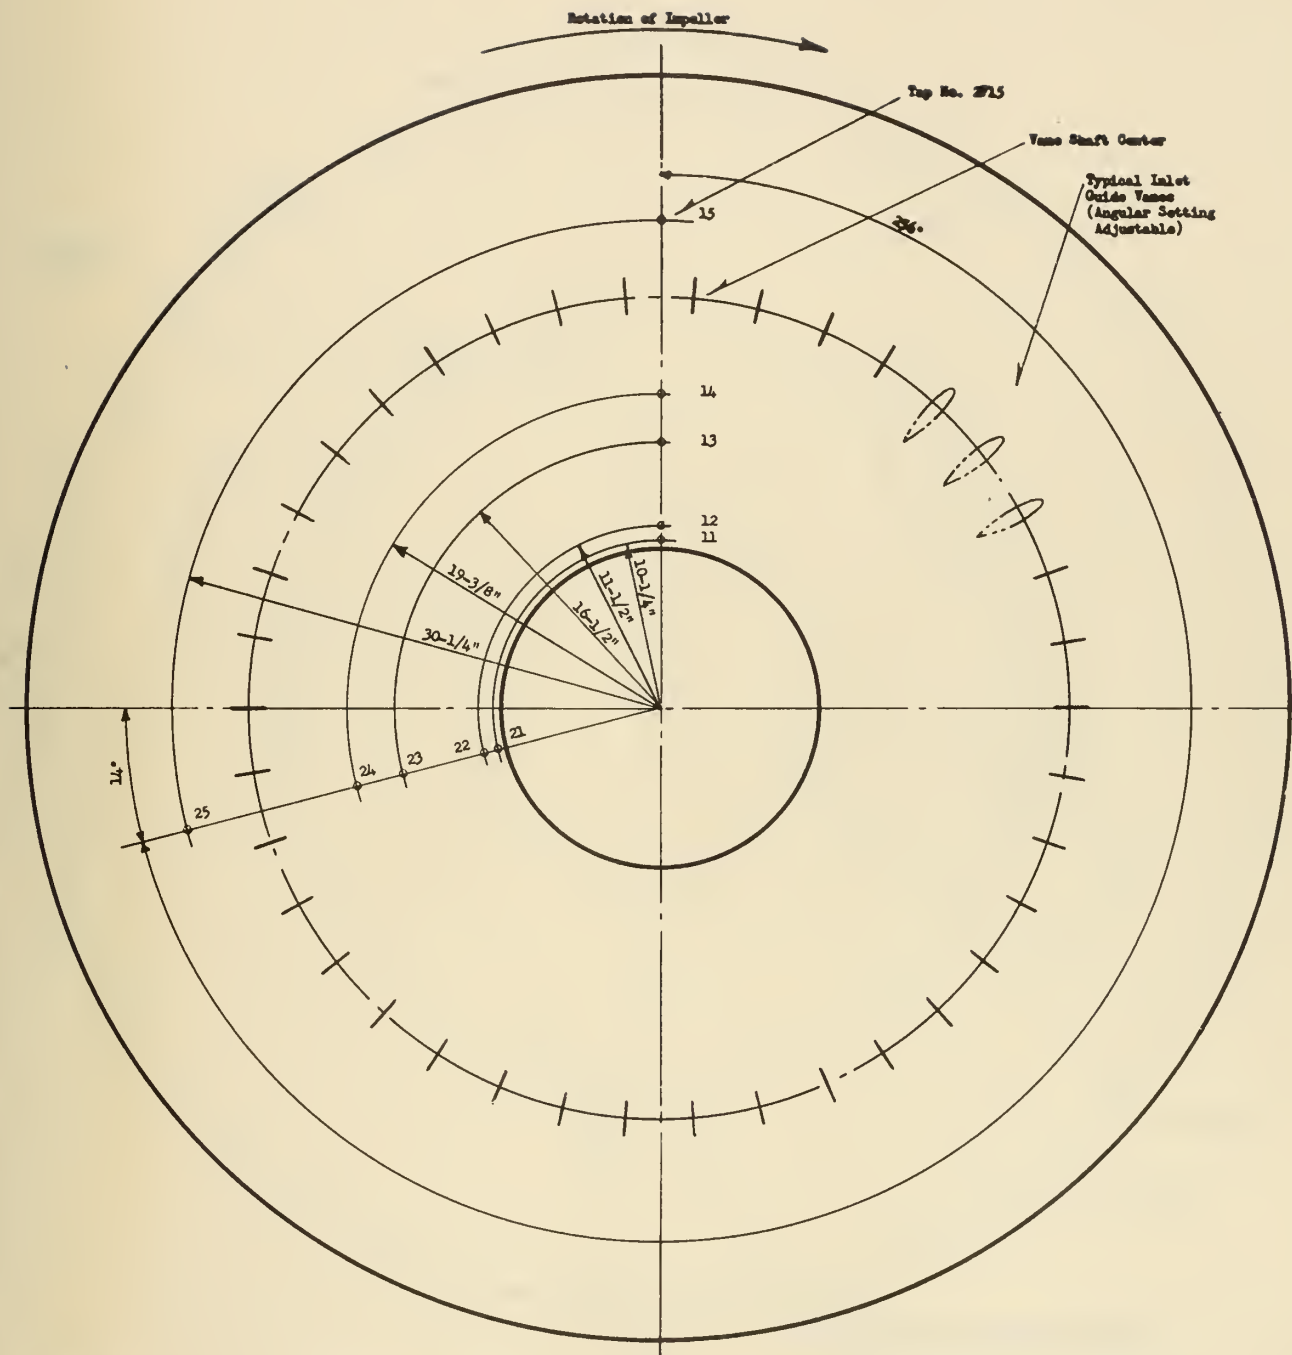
WALL PRESSURE TAPS AT FRAME NO. 2
